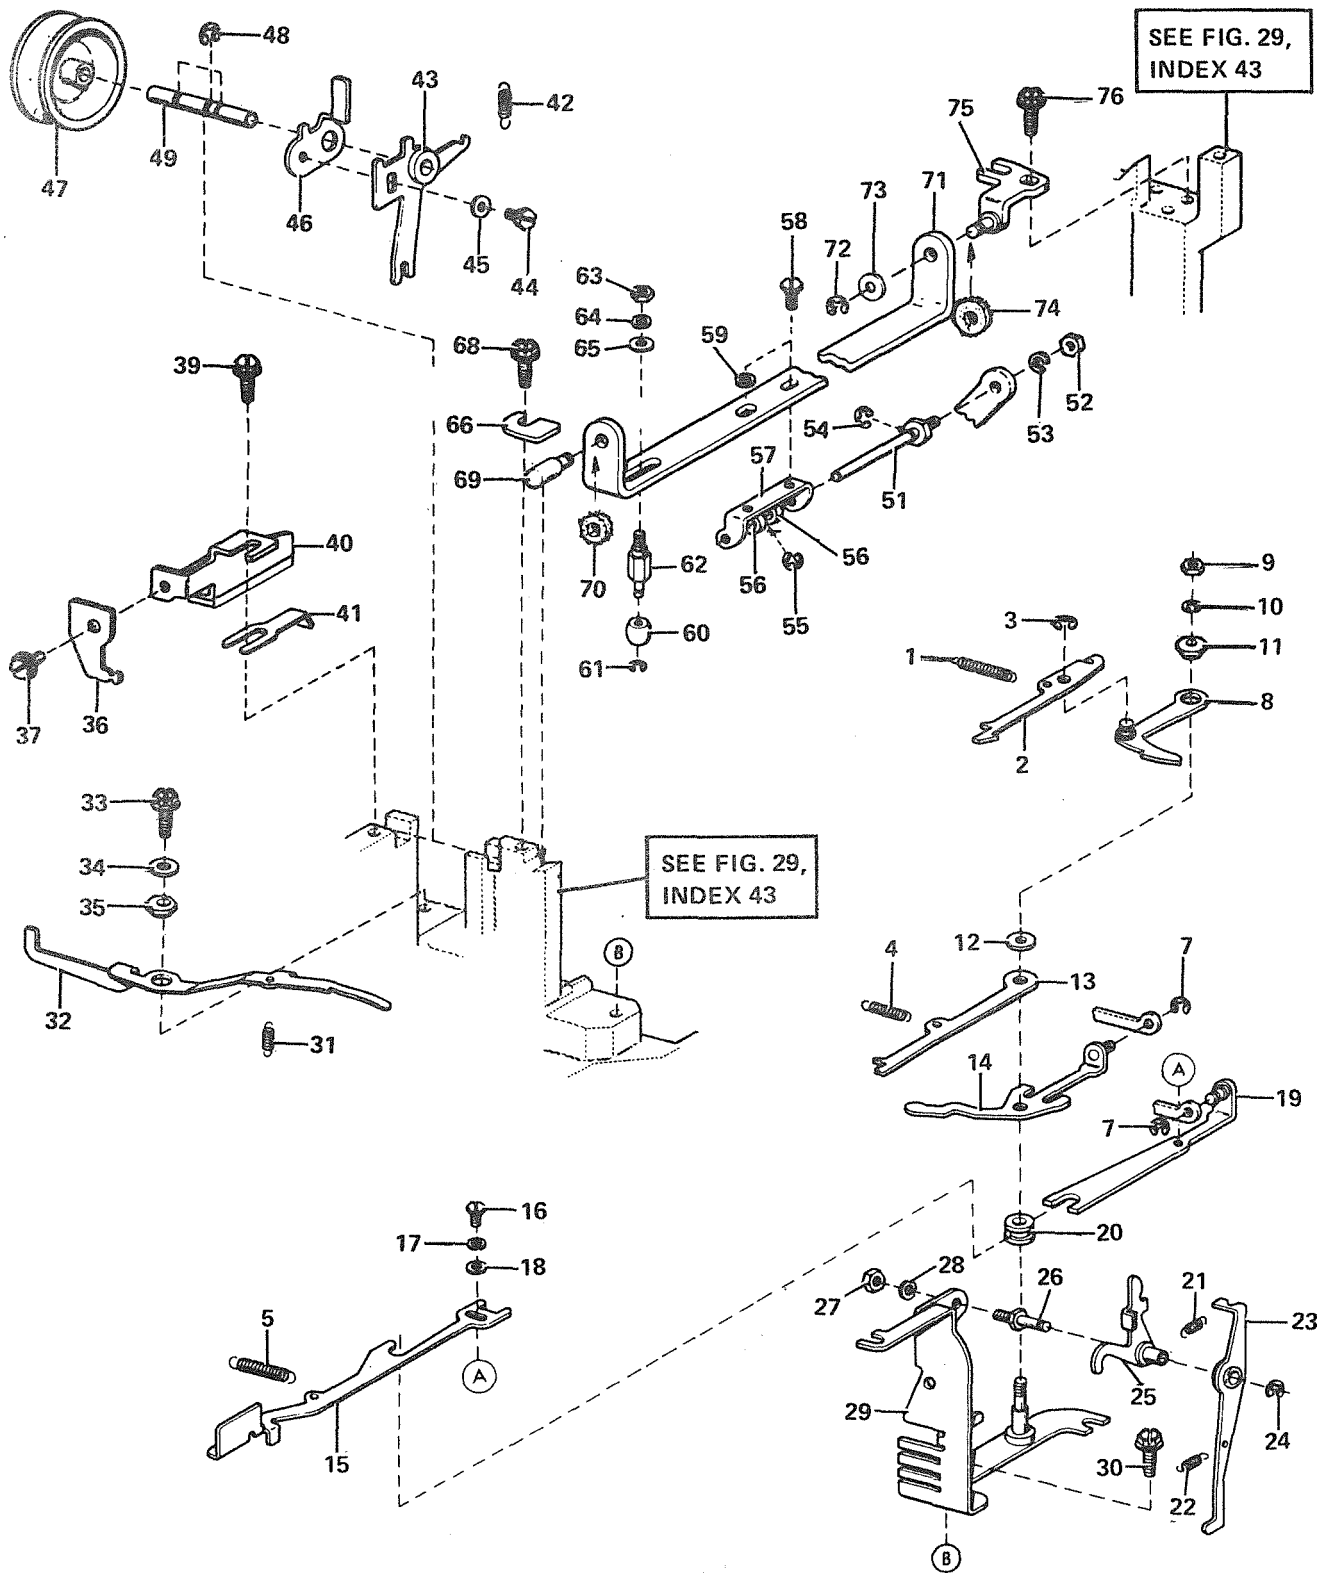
PRINTER-CARRIAGE DRIVE BAIL MECHANISM. SEE LIST 14.
